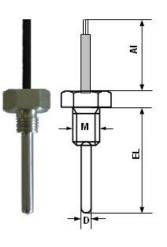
Fig.T-type temperature sensor Note: EL= Immersion length, AI= cable length, M= Mounting fitting, D= Sheath O.D.
